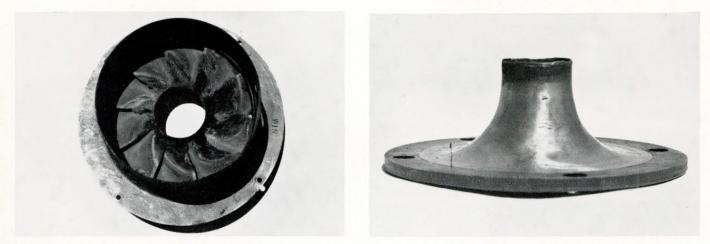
Modified design of combustion chamber components after 3,529 hours' running on marine Diesel fuel: (a) swirler vanes; (b) lipless shroud
